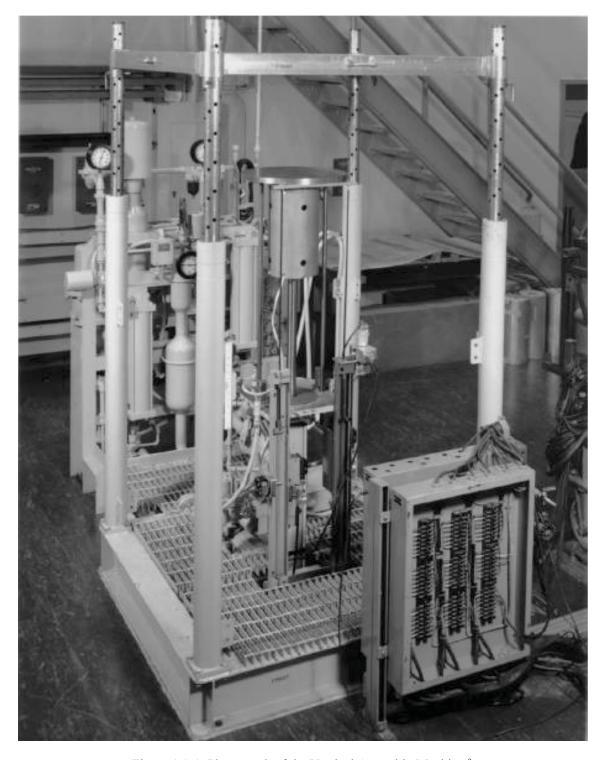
Photograph of the Vertical Assembly Machine.^a
